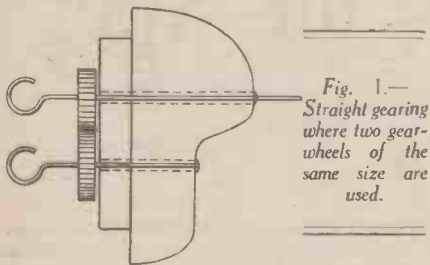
Straight gearing where two gear-wheels of the same size are used.
